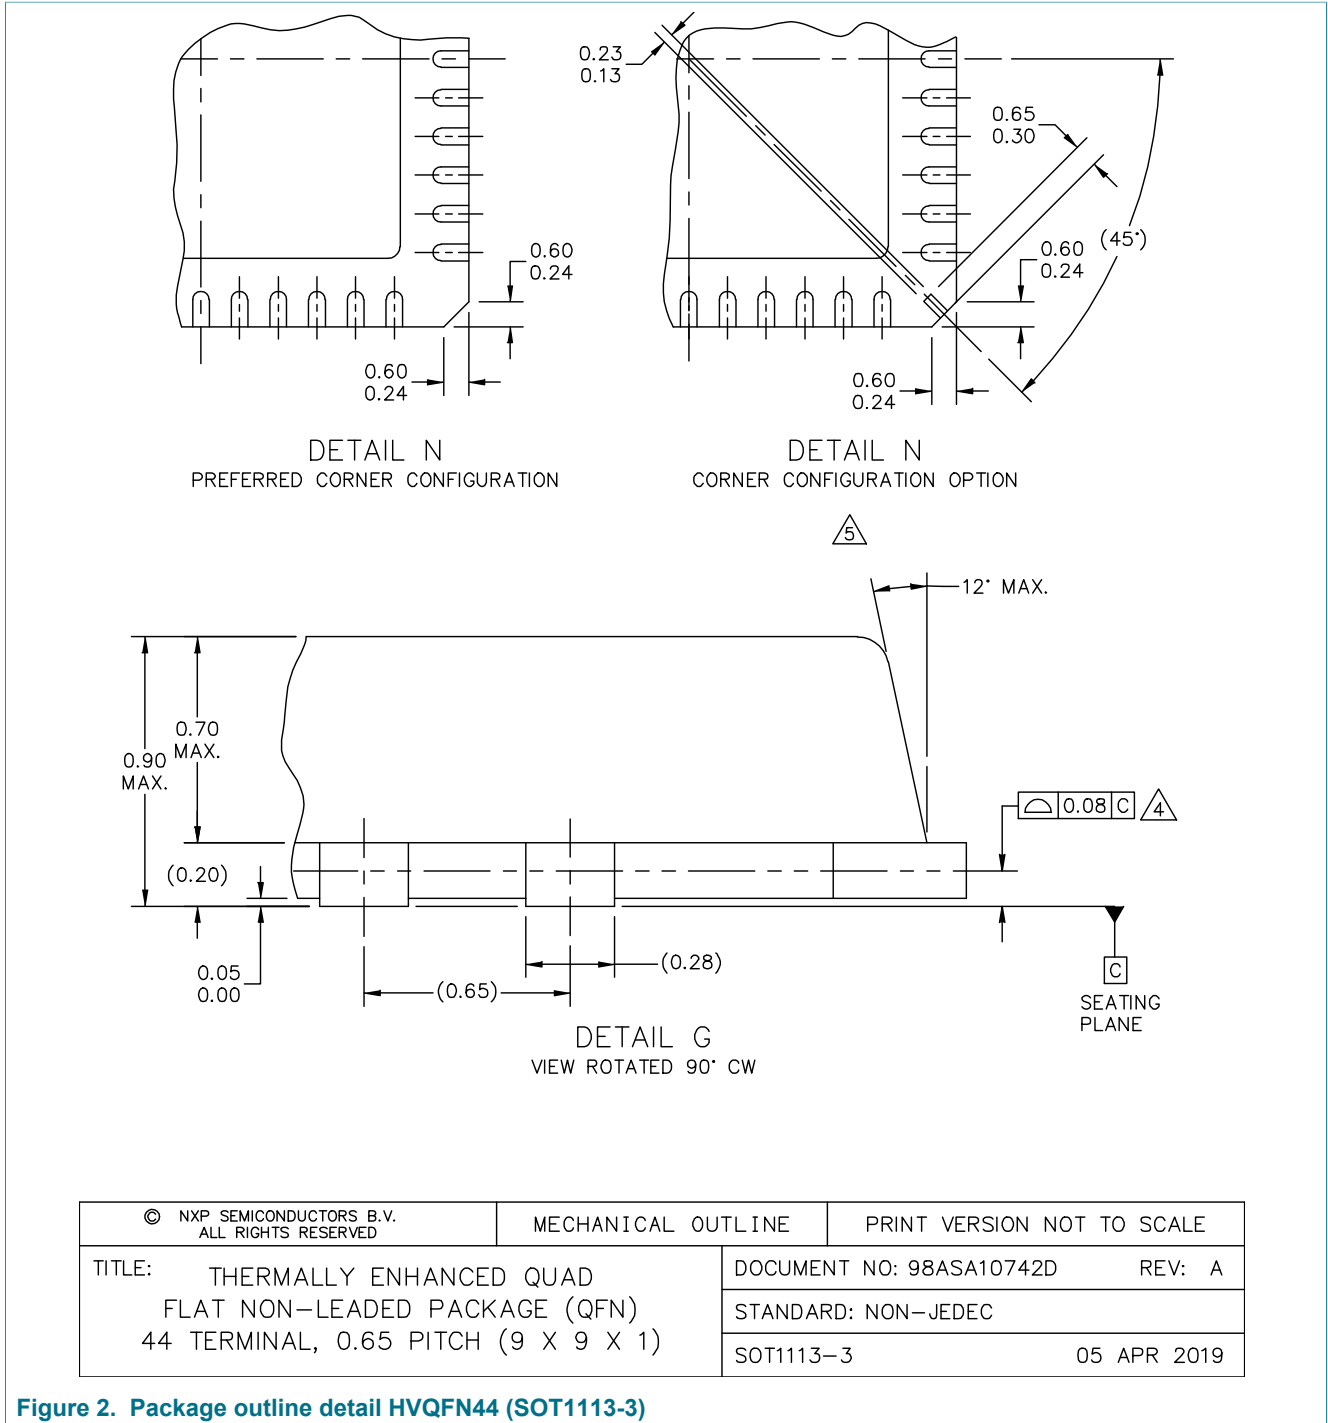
Package outline detail HVQFN44 (SOT1113-3)
